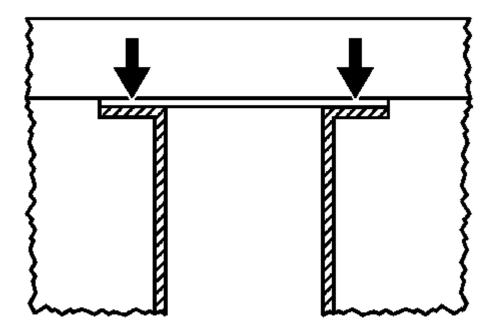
Checking Cylinder Block Deck Surface With Straight Edge Courtesy of GENERAL MOTORS CORP.
